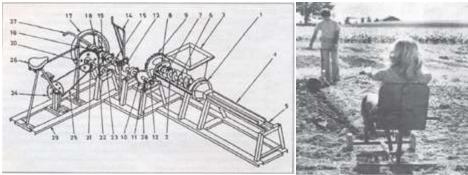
Pedal Powered Brick Machine and Farm Tractor [3]
